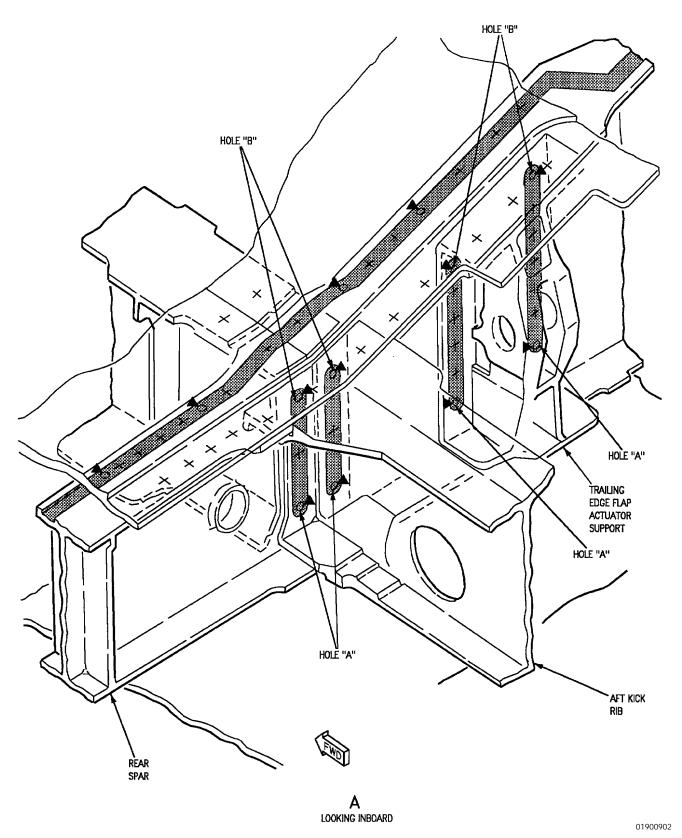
Rear Spar Channel Groove Seal Injection (Sheet 2)
